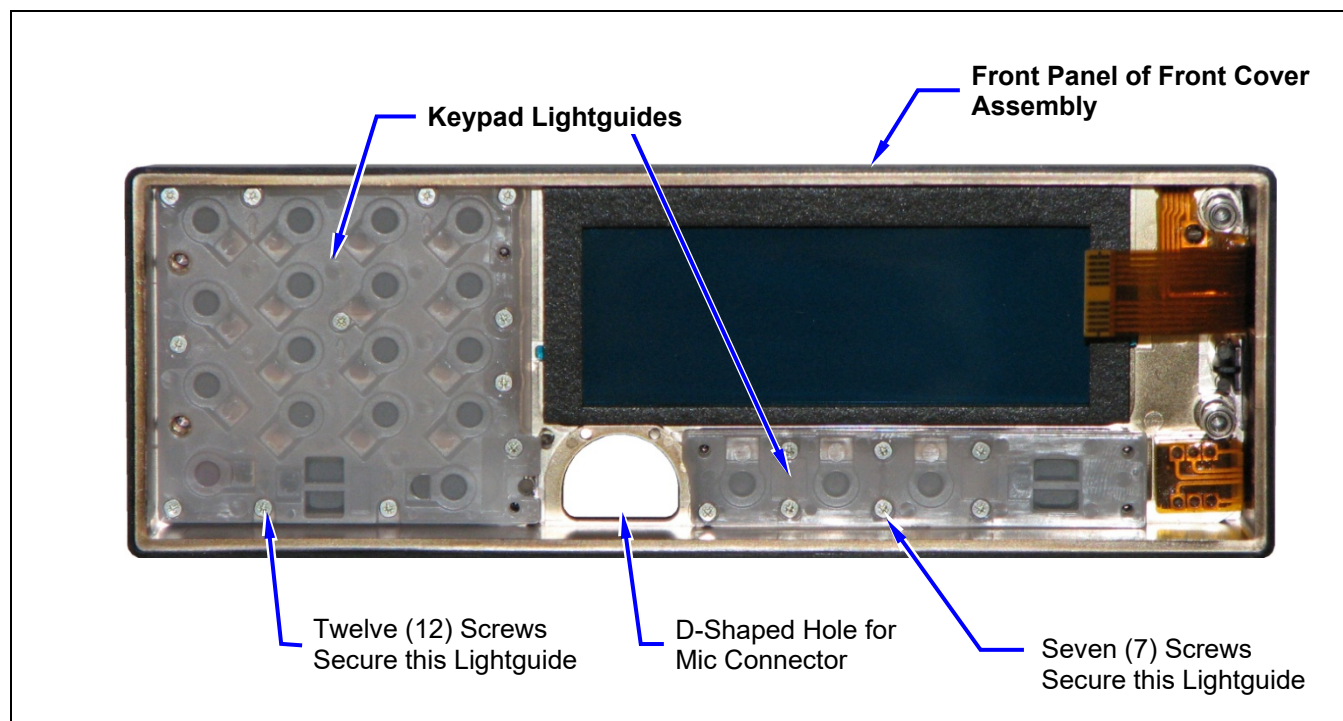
Keypad Lightguides and Related Hardware (Rear View of Front Panel)
